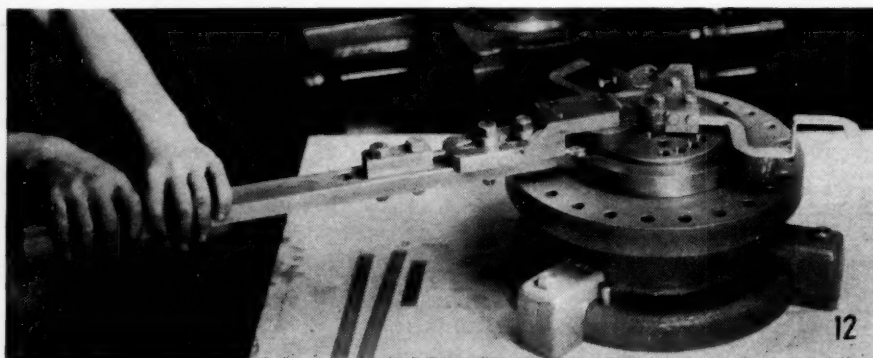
After making vertical bends shown at right, same bender is converted easily for forming the edge bends in this copper bus bar for a switchboard
